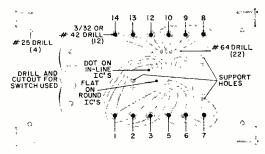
Parts layout for the socket-contact board. Note the three support holes for oscillator board.
